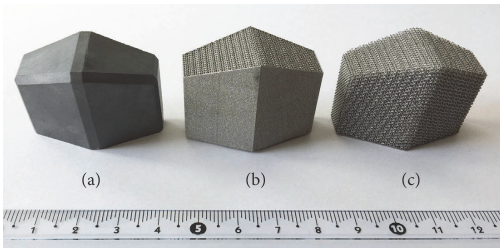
Tunnel boring machine insert produced by conventional powder metallurgy method (a), 3D printed structure for HIP (b), 3D printed structure ready for filling and following consolidation by SPS (c) (length, width and height of sample is 36 × 16 × 30 mm).
